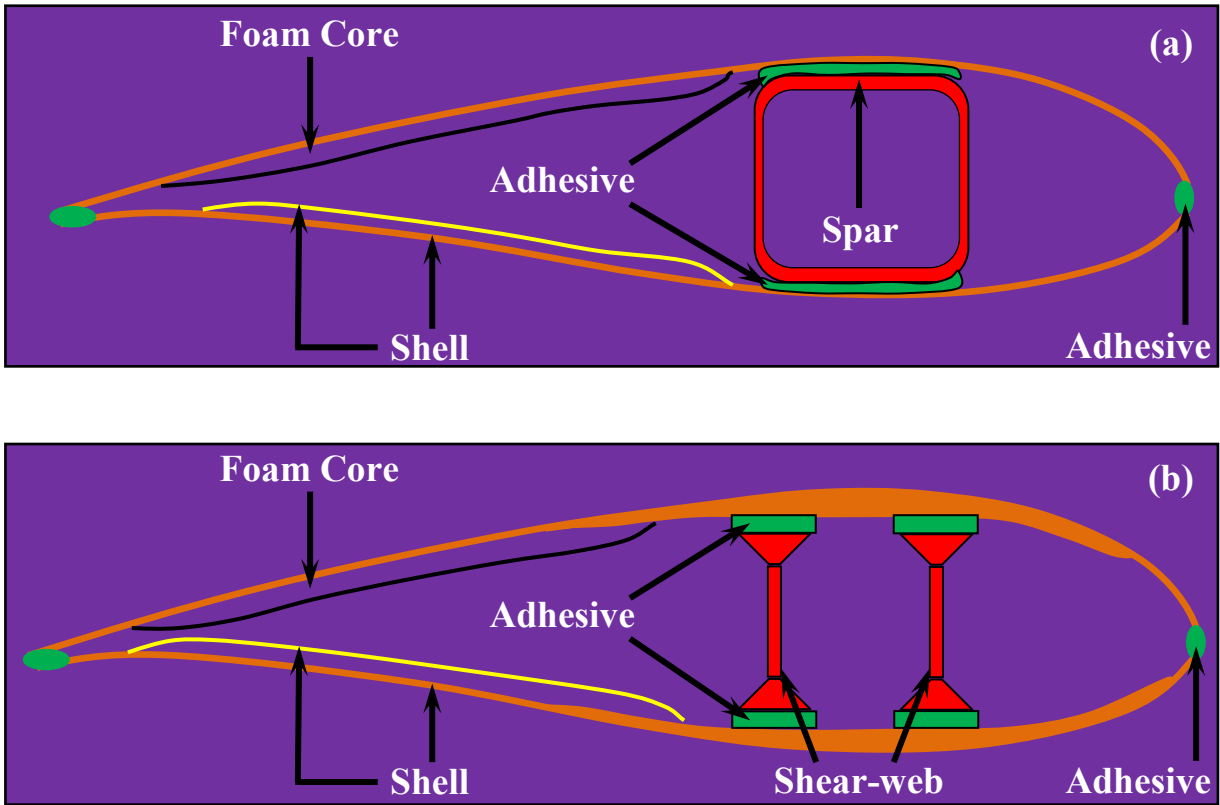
Typical turbine-blade cross-sectional area in the case of: (a) the one-piece construction; and (b) the two-piece construction.
